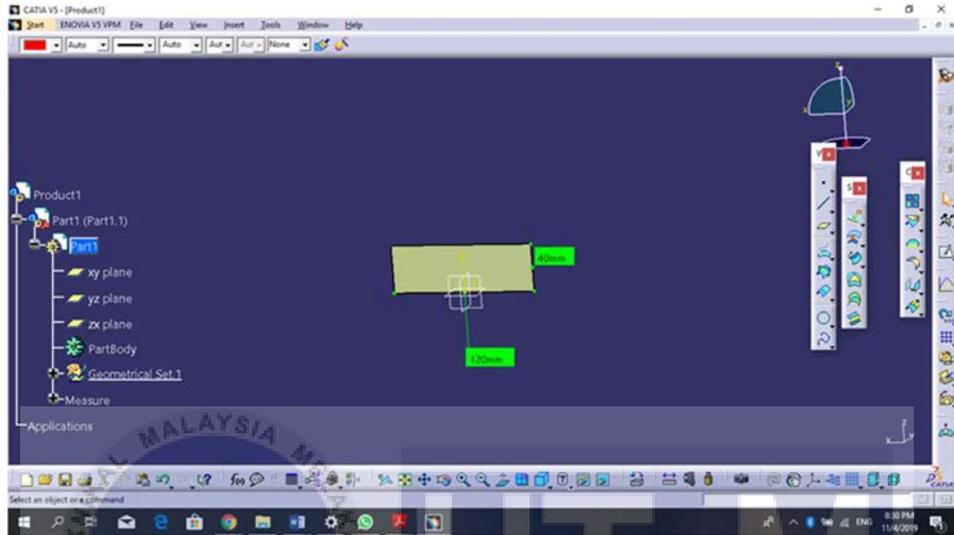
Three – dimensional modelling of a multi - layer (120 mm x 40 mm) using Catia software
